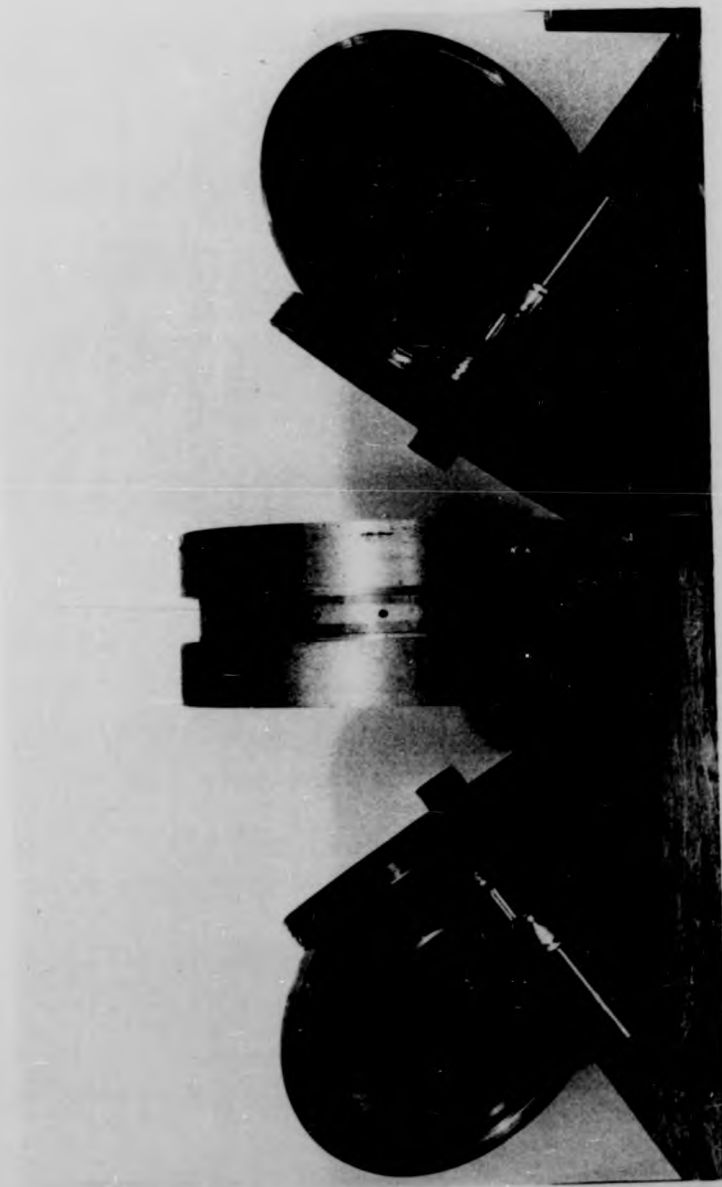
(a) : Components of 20kW twin rotor disc motor
